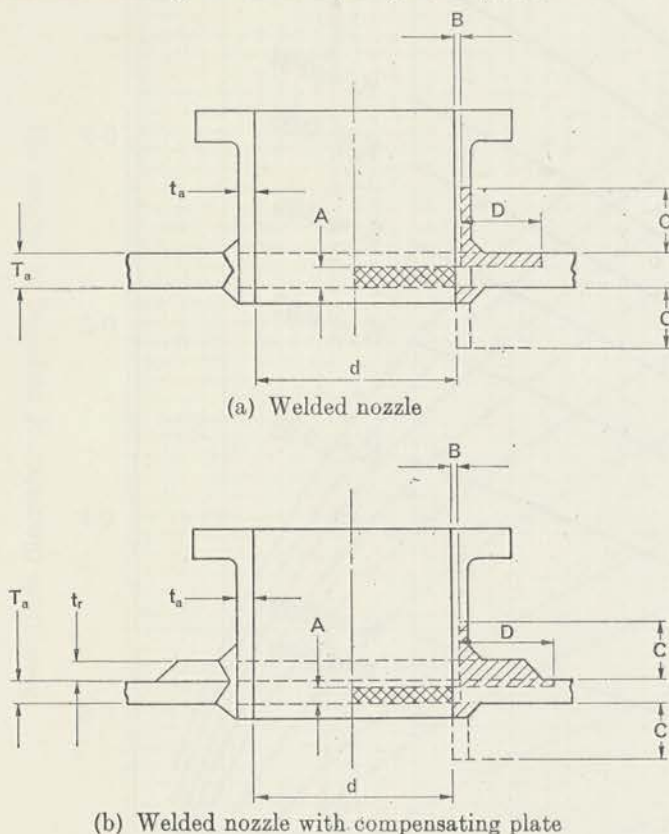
COMPENSATION FOR WELDED STANDPIPES OR BRANCHES IN CYLINDRICAL SHELLS.
